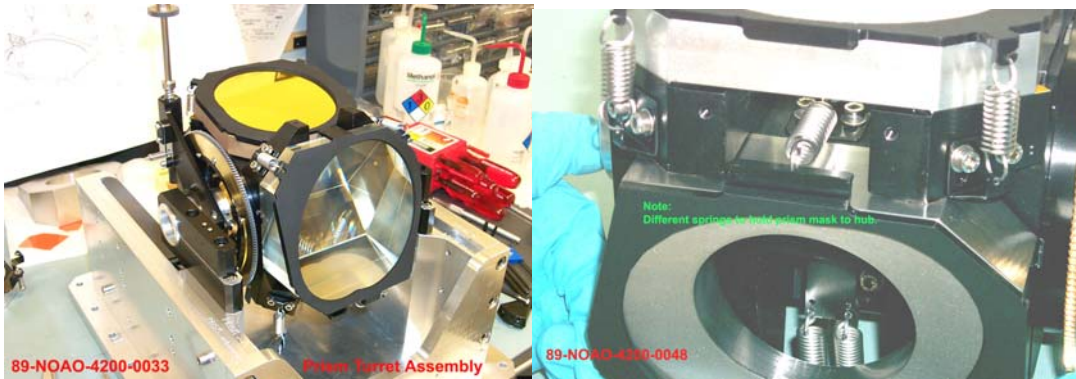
Left: Assembled prism turret in the work fixture. Right: Closeup of the turret, showing the spring tensioned masks which hold the prisms in place.
